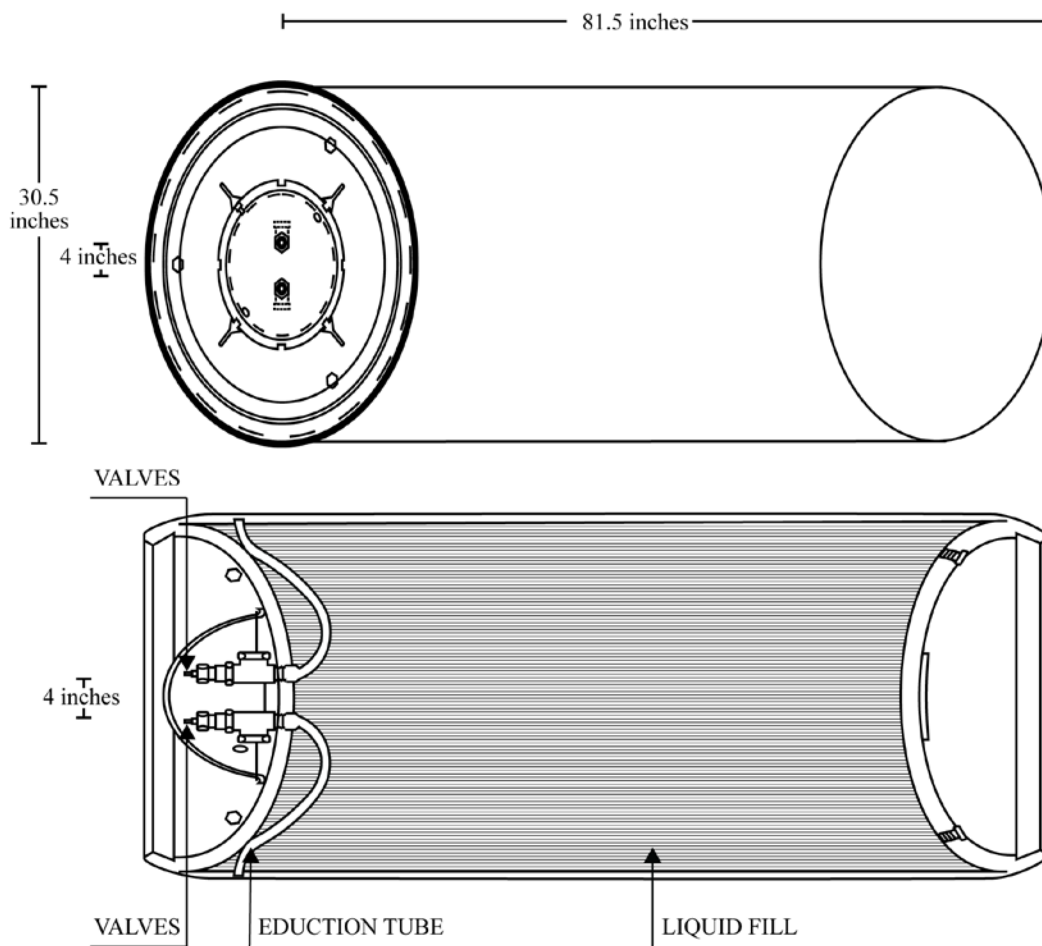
Container, Bulk, One-ton, Type D - Line Drawing
